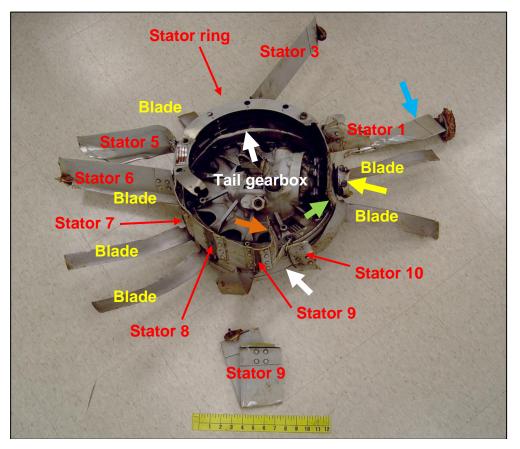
The right side of the tail gearbox and stator ring assembly recovered.
